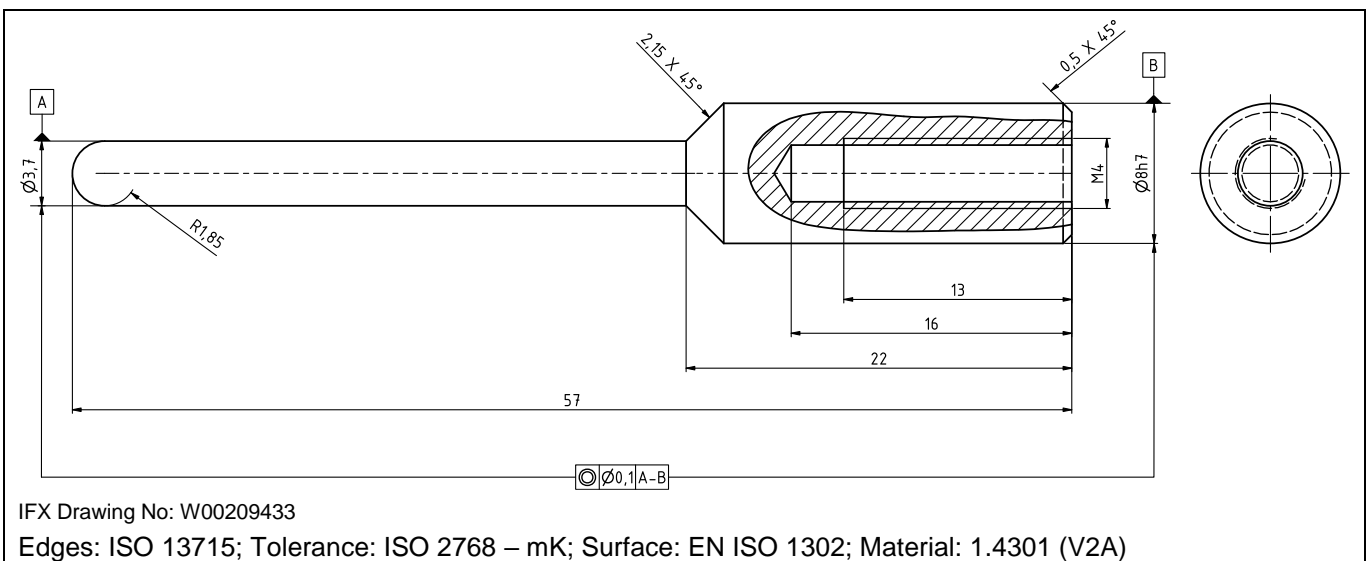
Technical drawing of the X/Y alignment domes of the sample press-tool (2 times for the top tool). The alignment domes can be fixed by metric M4x18 DIN7991 screws in the top tool.
